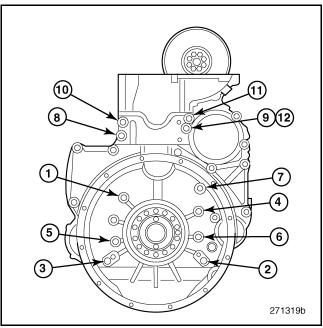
Flywheel Housing Fasteners (Shown with Torque Sequence)
